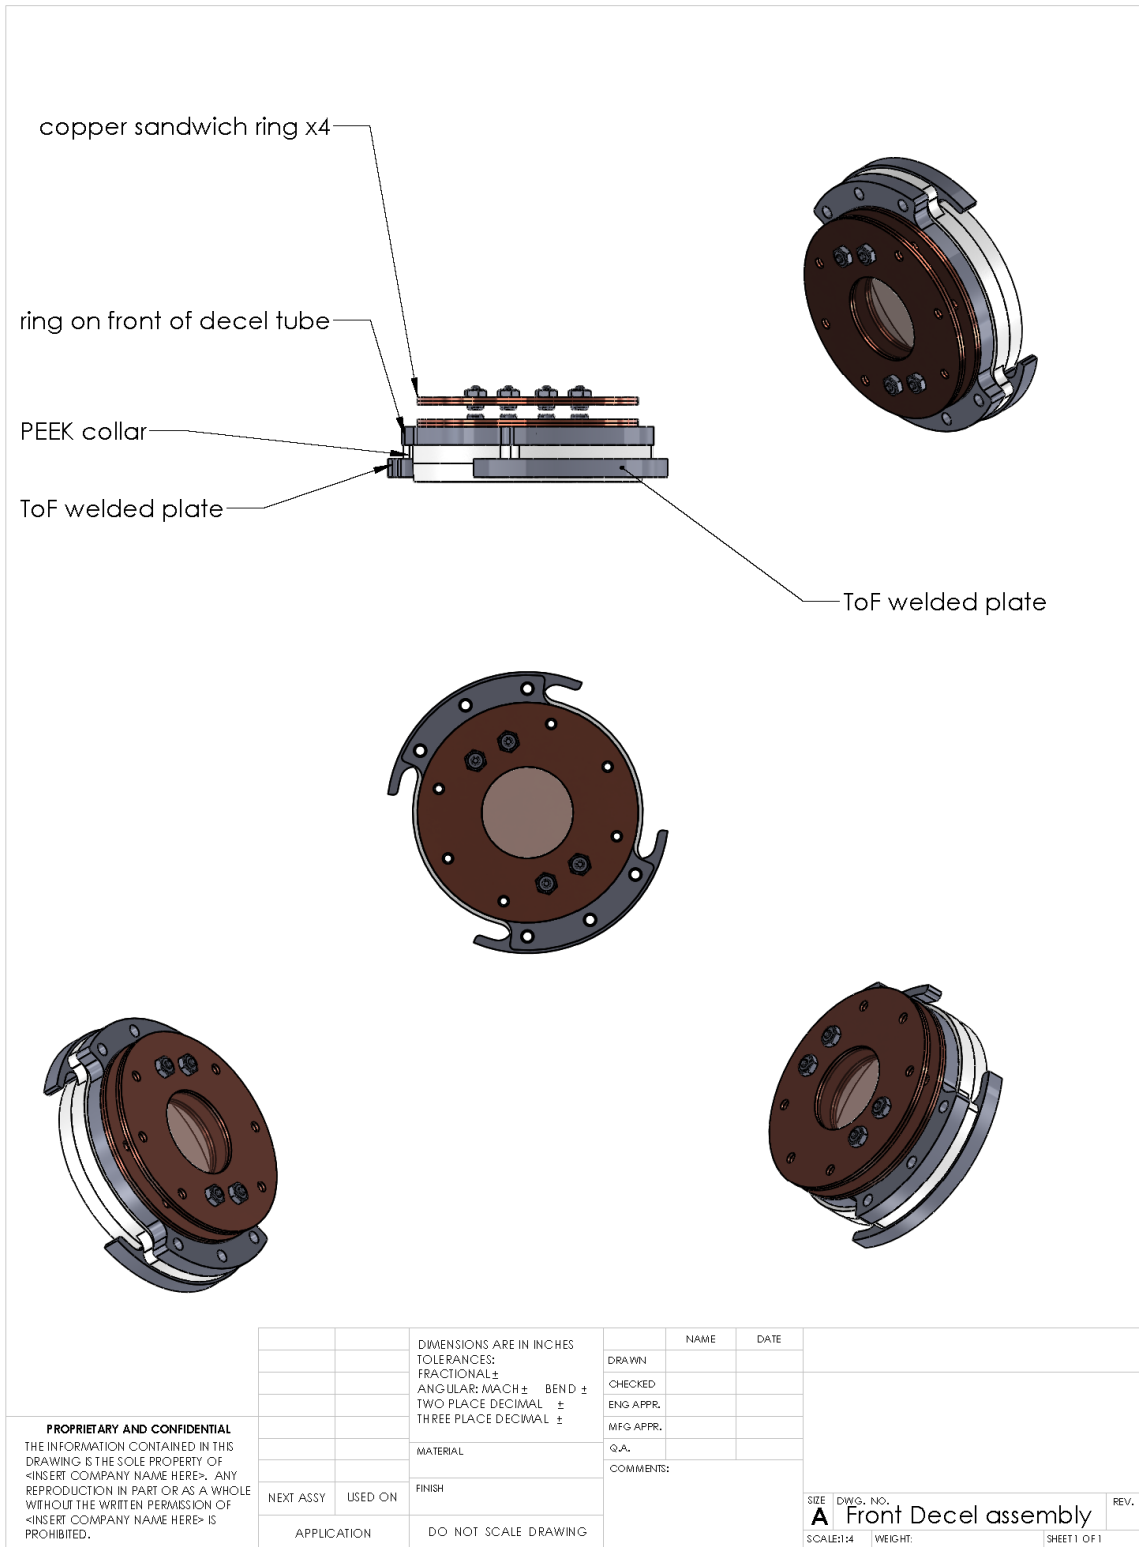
Electrode assembly at the front of the decelerator tube with mounting brackets shown.
